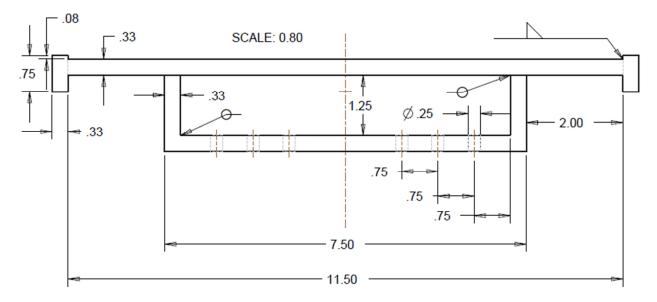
Second design of the prototype solar support frame with two long welded brackets
